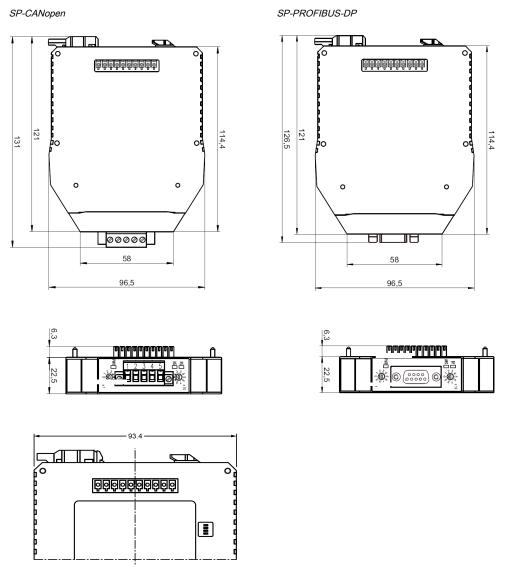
Dimensional drawing CANopen and PROFIBUS gateways (mm)
